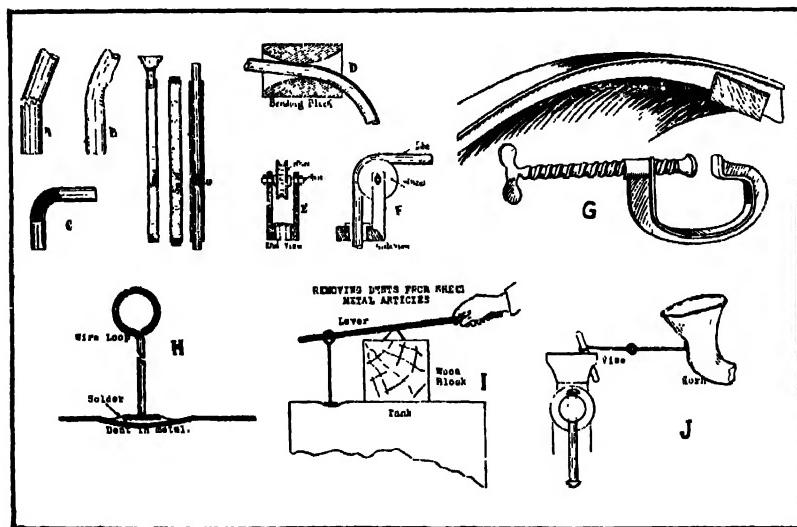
How to Remove Dents from Sheet Metal Objects and Methods of Bending Steel Tubing and Pipe.
